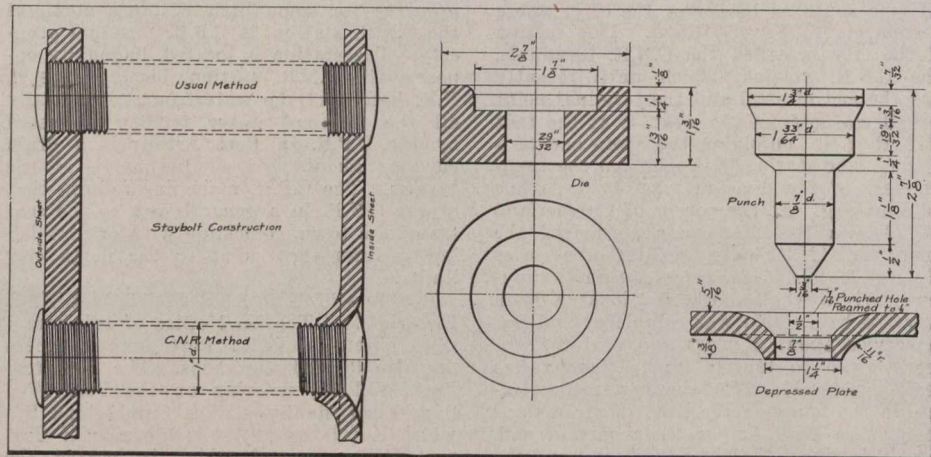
Punch and Die for Depressed Staybolt Holes.
